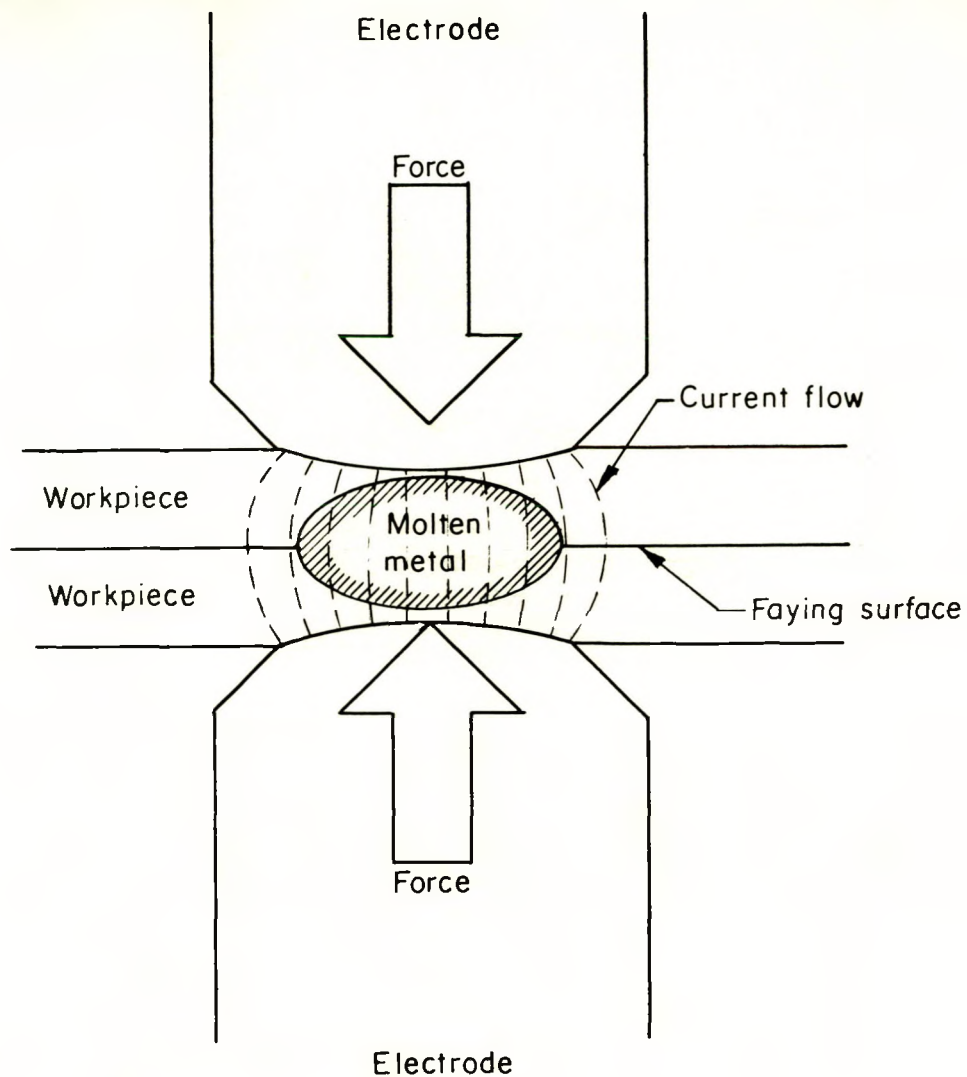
SKETCH SHOWING ELECTRICAL FLOW AND HEAT GENERATION IN A SPOT WELD
